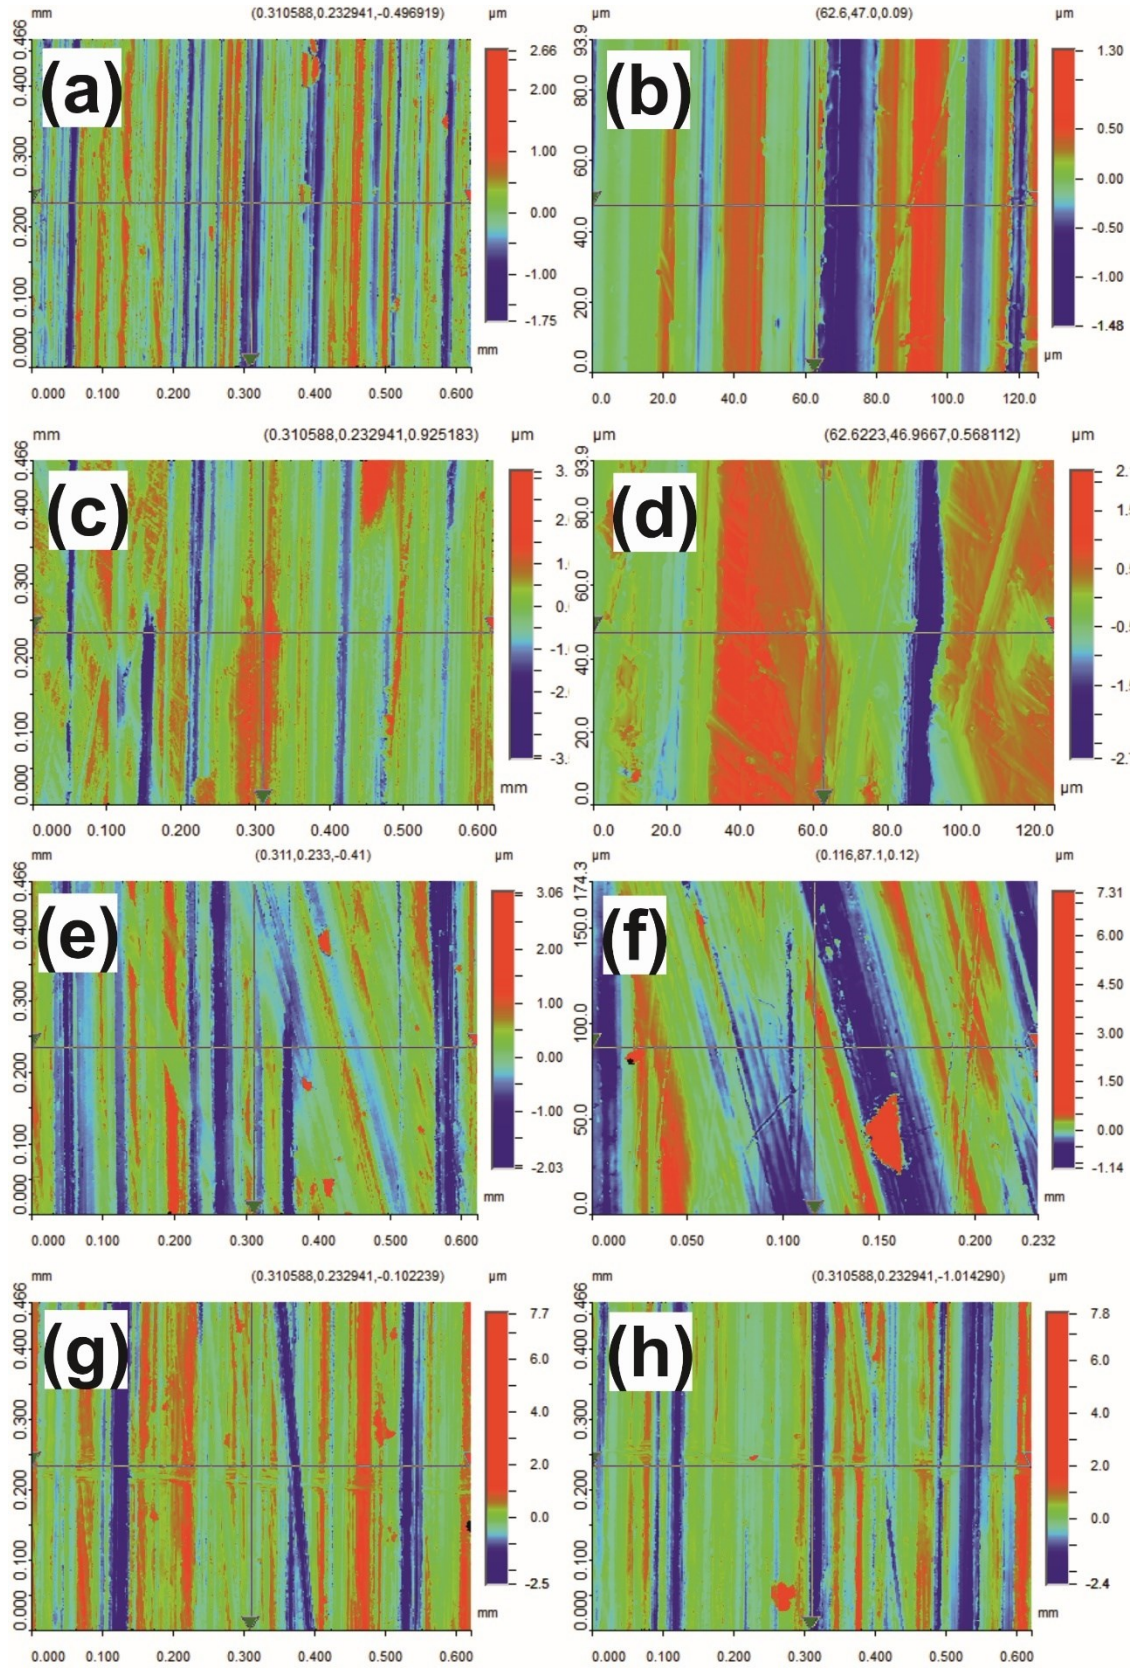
Surface profiles of drilled specimens; a) Specimen 1 @ 10X; b) Specimen 1 @ 50X; c) Specimen 2 @ 10X; d) Specimen 2 @ 50X; e) Specimen 3 @ 10X; f) Specimen 3 @ 50X; g) Specimen 4 @ 10X; h) Specimen 4 @ 50X.
